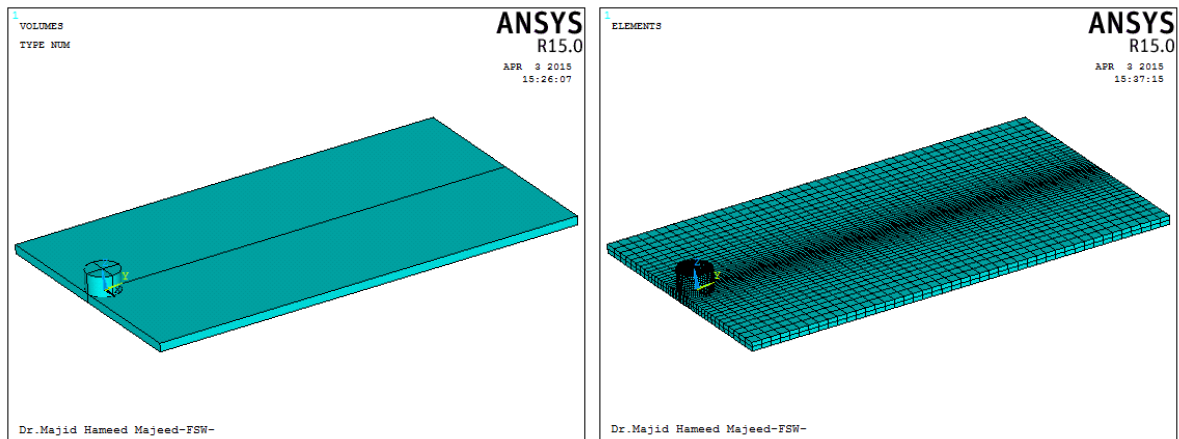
3-D Model of workpiece and tool with finer mesh.
